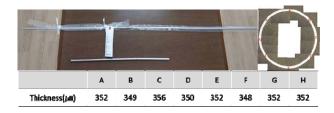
Photo of FeCrAl tube fabricated by pilgering with a dimension of 9.5 mm OD x 0.35 mm t x 1.9 m L.
